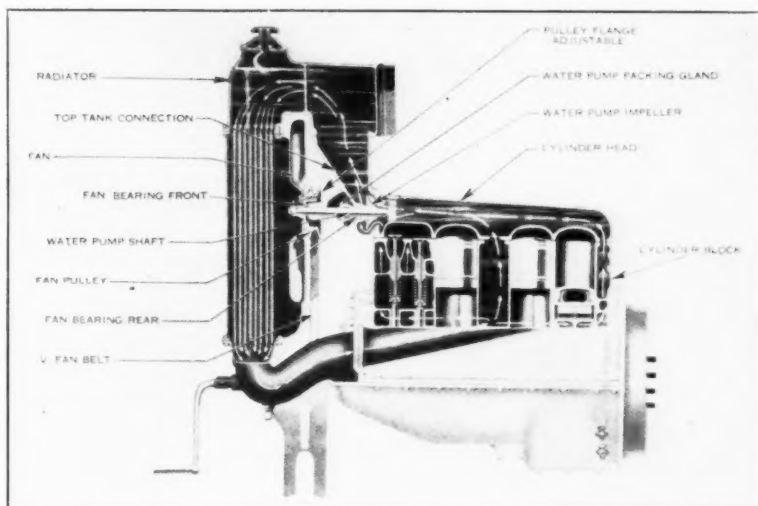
Sectional view of a Fordson engine, showing in part path followed by the cooling water as it passes through the engine.
